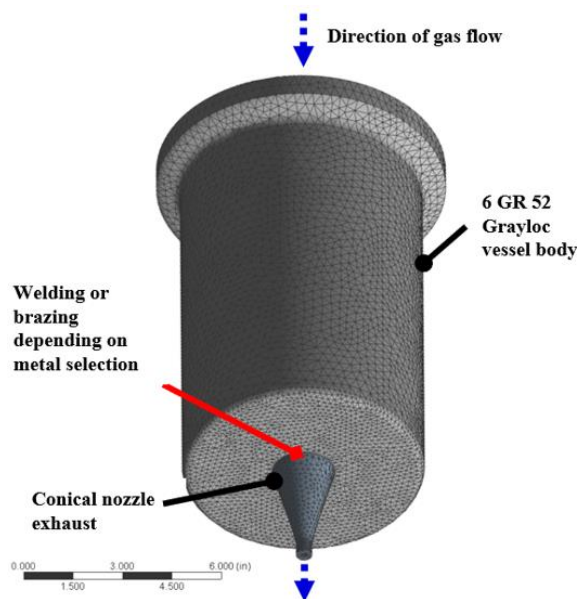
Design 1, Revision 1 of the gas exhaust system uses a conical nozzle
